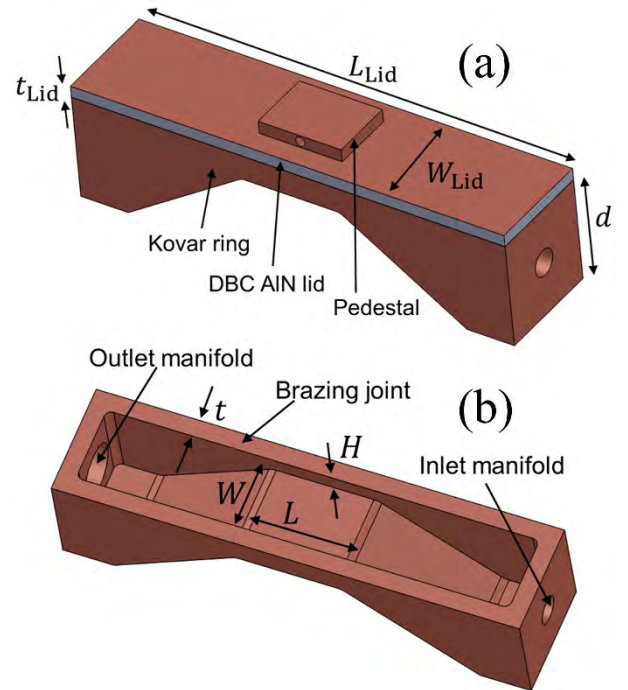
CAD model of the heat sink. (a) Enclosure; (b) Exploded view.
